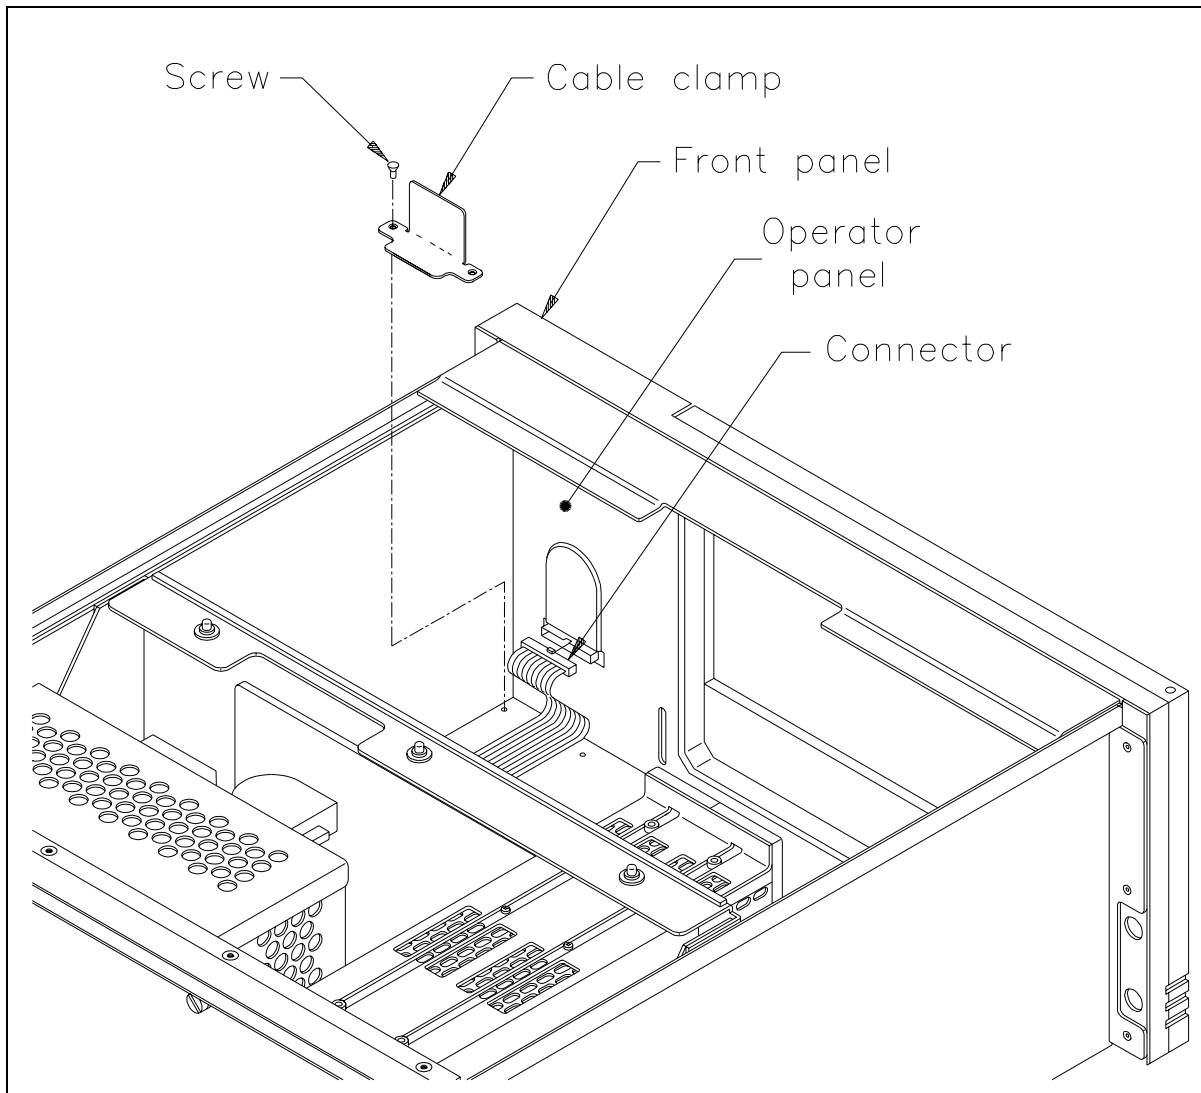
Disconnecting the operator panel cable from the rack-mount model
